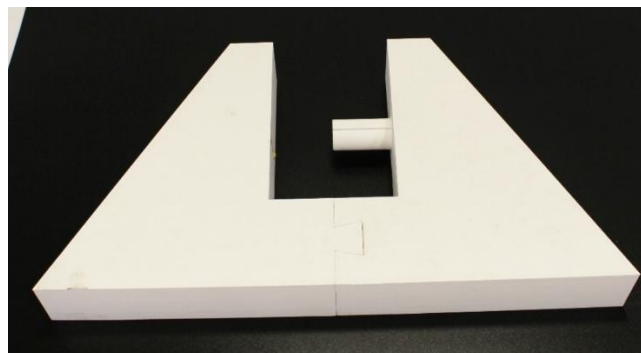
3D printed extension for Dual Axis one way bearing systems- mark 3
